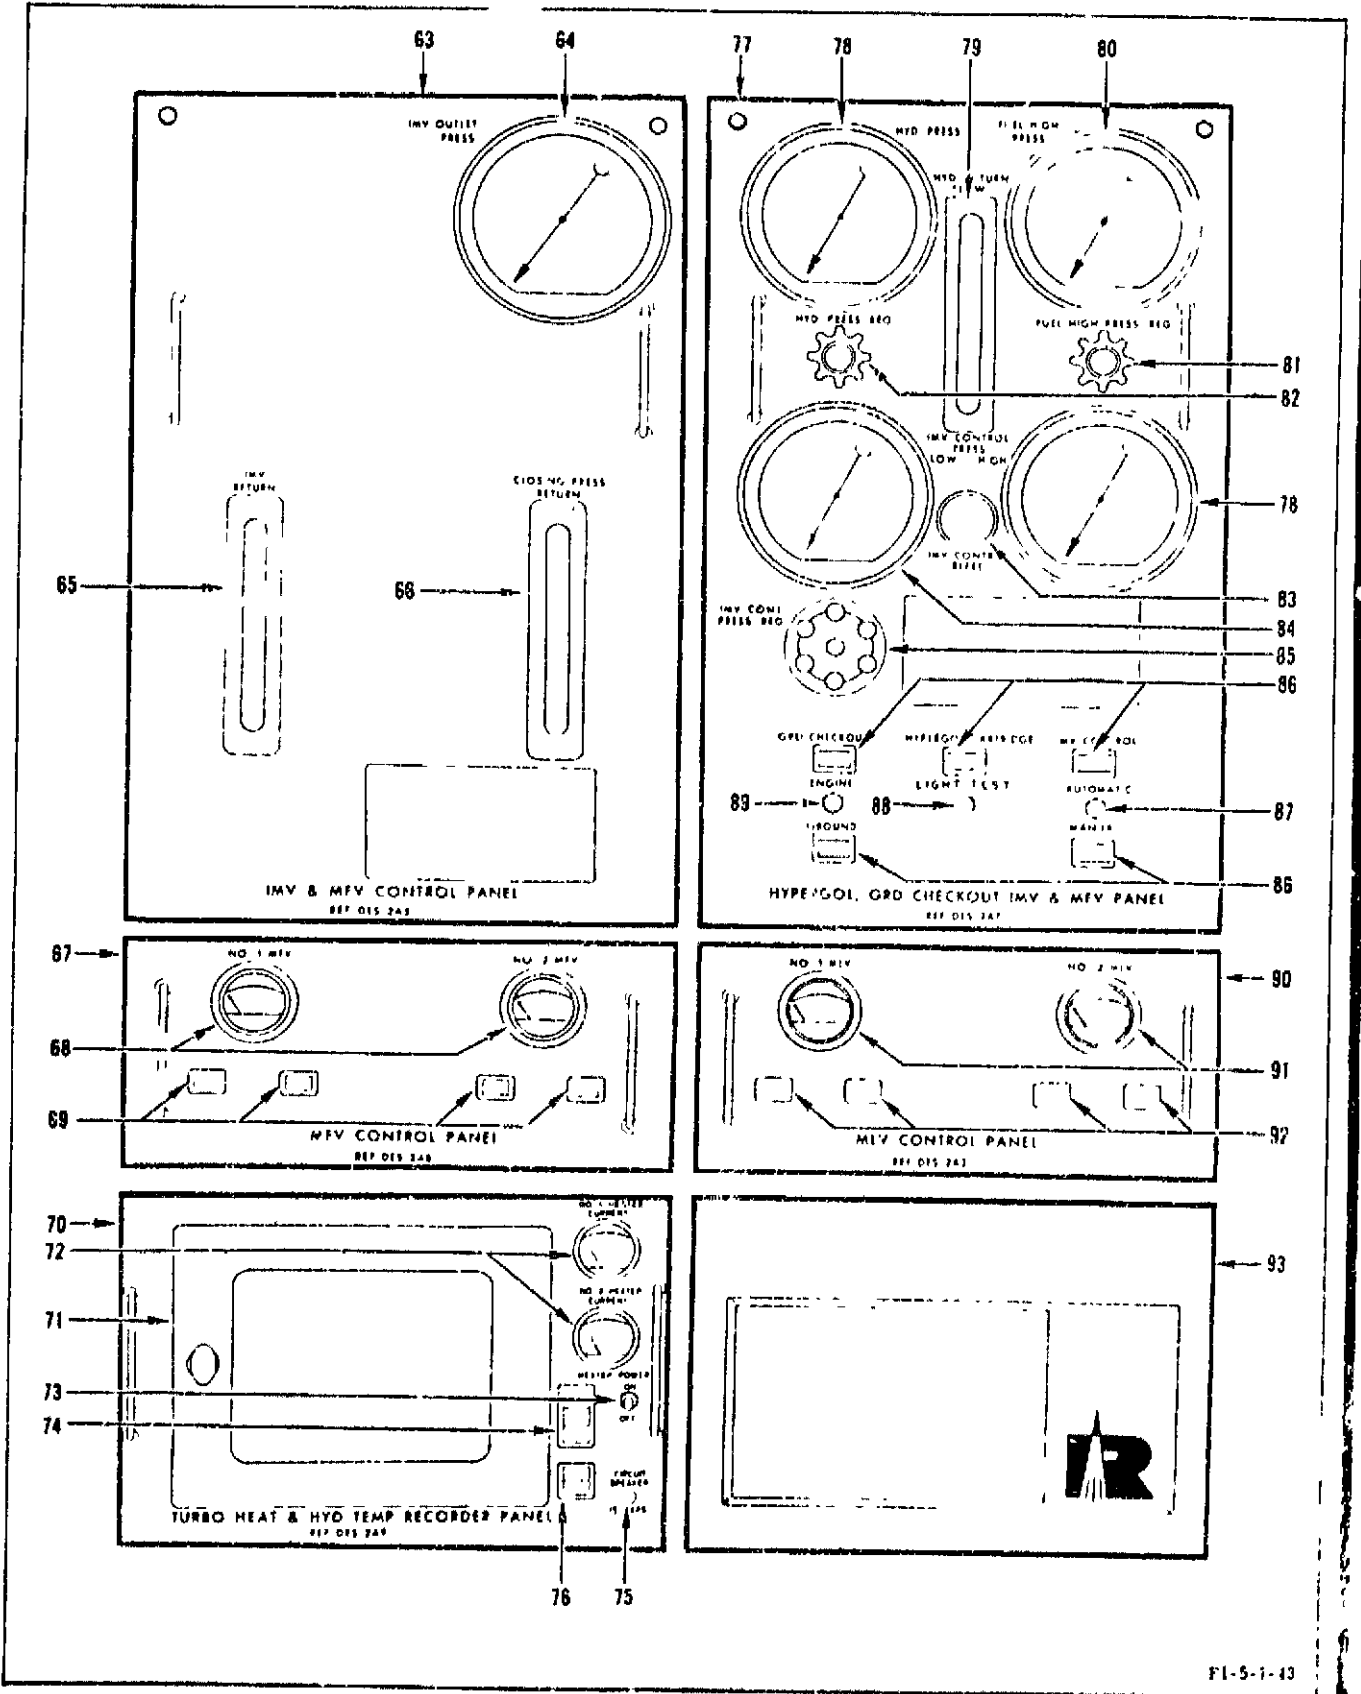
Disassembly of Engine Checkout Console (Sheet 3 of 20)
